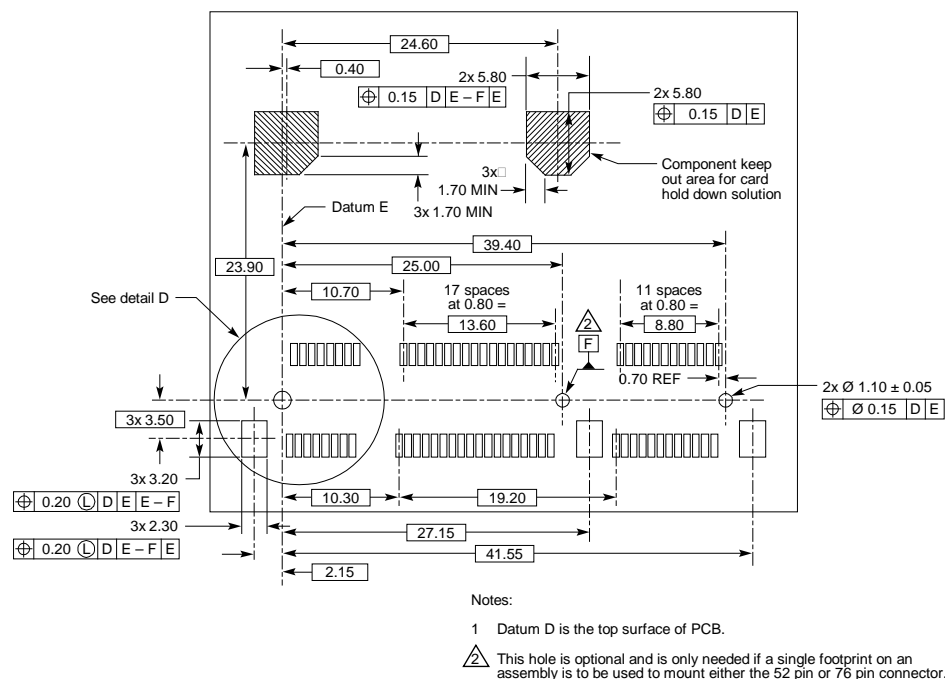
Recommended System Board Layout for Dual-Use Full/Half-Mini Card Socket
